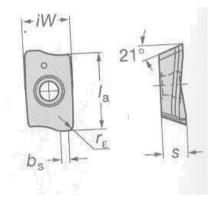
Tool inserts used for experimentation, PVD TiAlN coated (4 μ m single layer) carbide insert. Dimensions, [mm]: $l_a = 11$; iW = 6.8; s = 3.59; $b_s = 1.5$; $r_e = 0.8$
